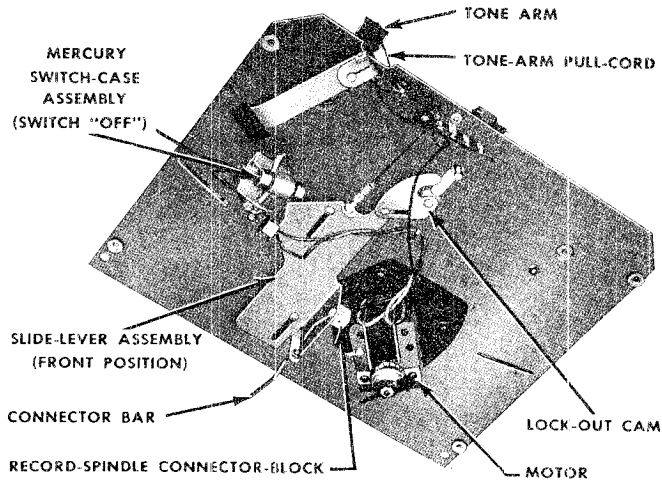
BOTTOM VIEW, COMPONENTS IN OPEN-DOOR POSITIONS, WITHOUT RECORD.
